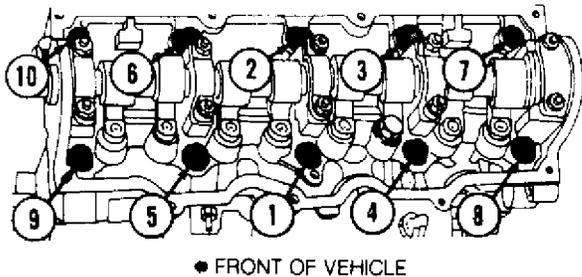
Typical Cylinder Head Tightening or Loosening Sequence
